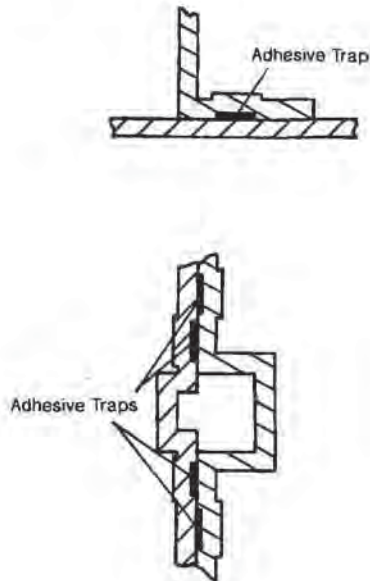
Formed-in adhesive traps for assembling, twin-sheet forming
